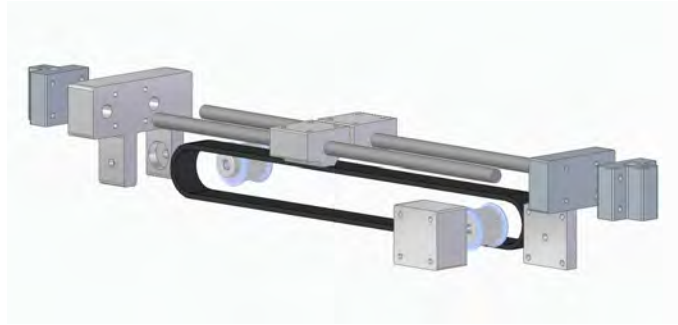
Exploded view of the delivering system, made with Solid Edge[14]
